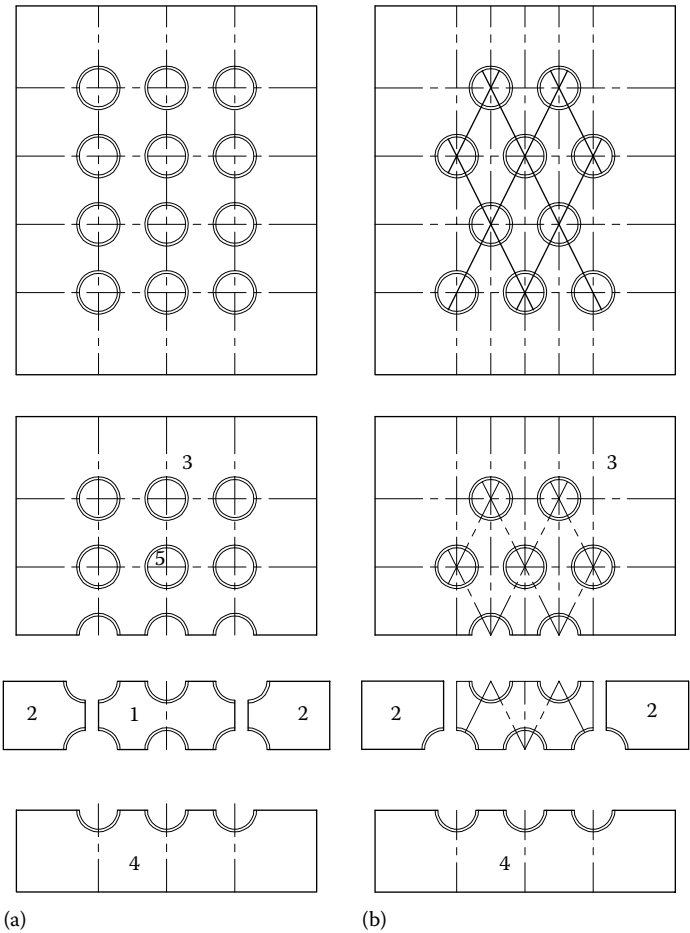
Mock-up model for tube-to-tubesheet expansion. (a) Square layout and (b) 60° layout.
